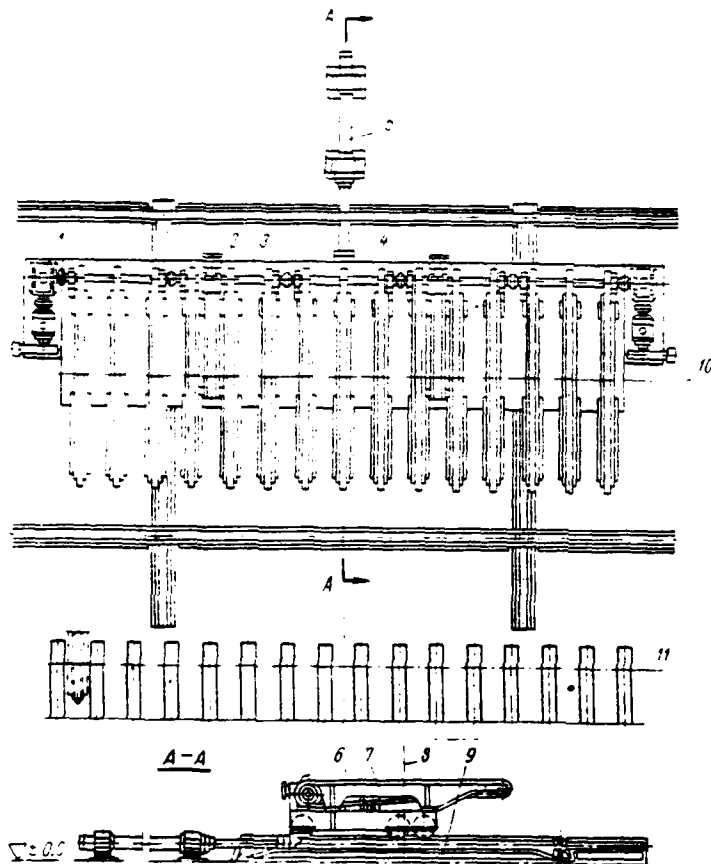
The truck: 1 - reducers; 2 - detents; 3 - platform; 4 - shaft of sprocket drives; 5 - hydraulic cylinder of the displacement of truck; 6 - circuit of transporter; 7 - bearing/gully; 8 - the longitudinal axis of press; 9 - arch of press; 10 - the longitudinal axis of press; 11 - axis/axle of the chain wheels of furnace transporter or cooler.
